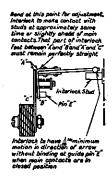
Detail Showing Adjustment of Type L-33 Electrical Interlock
